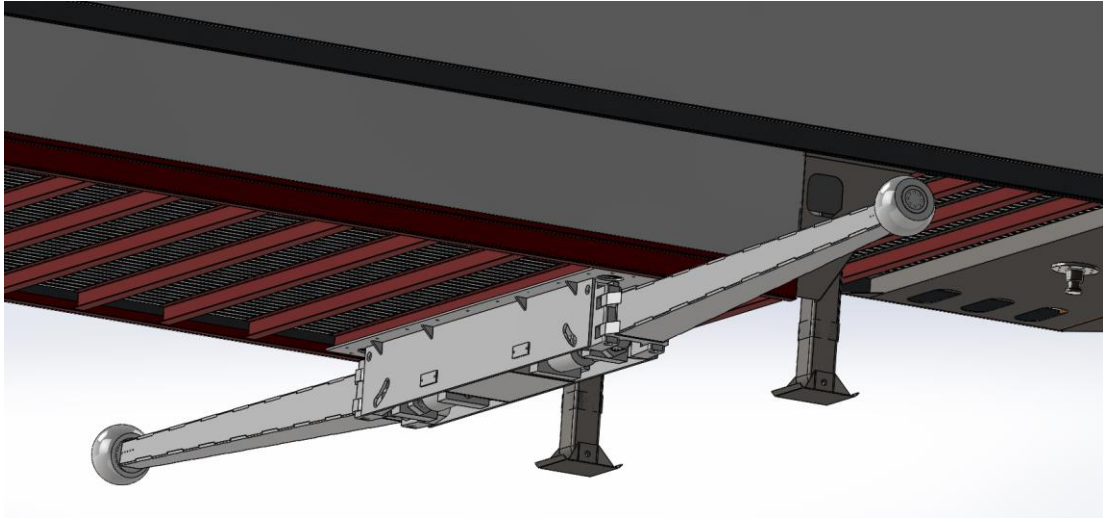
The entire CVeSS outrigger assembly is mounted to the trailer frame rails.
